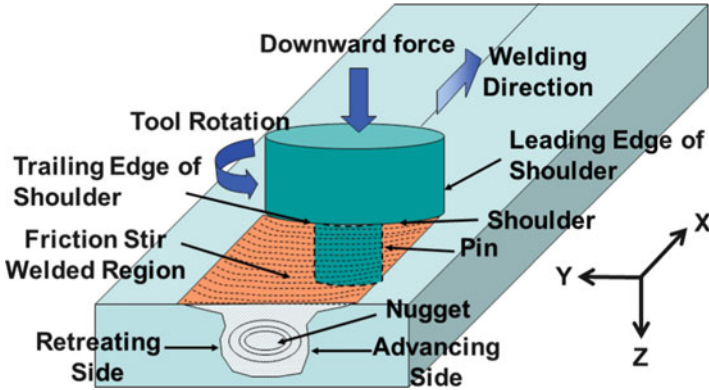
A schematic drawing of friction stir welding in a butt joint configuration
